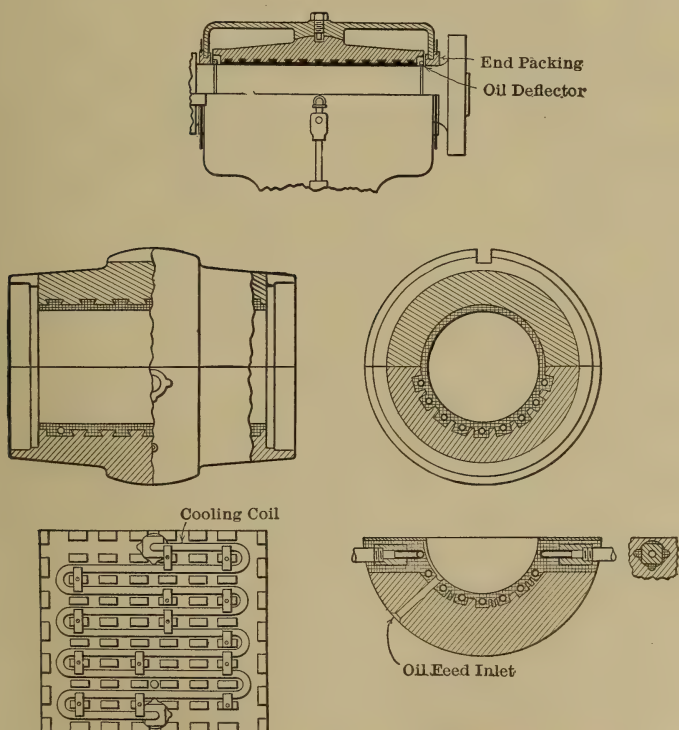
Water-cooled Bearing, Horizontal Curtis Turbine.
